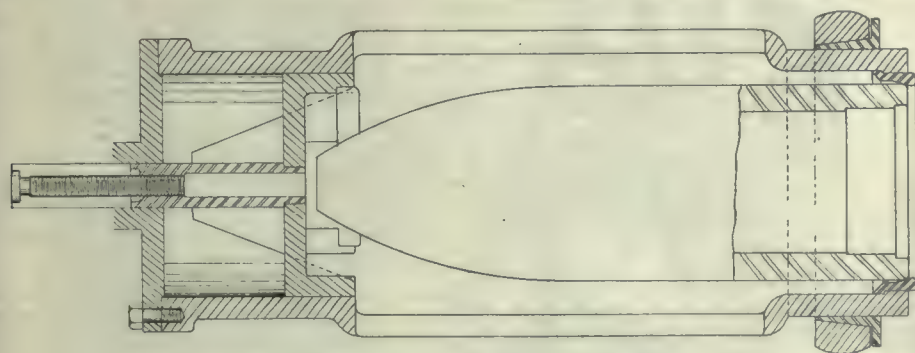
OPEN SPINDLE FOR LARGE SHELLS.
